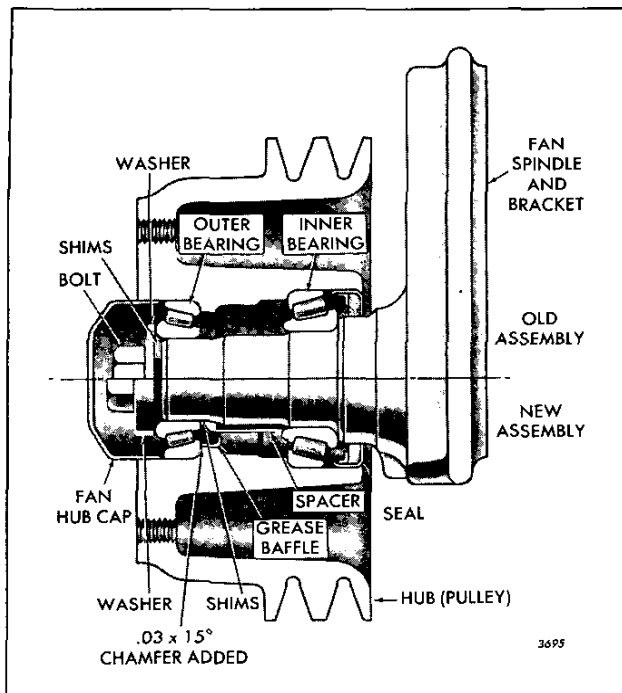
Spindle Type Fan Hub Assembly (6V and 8V Engine)
